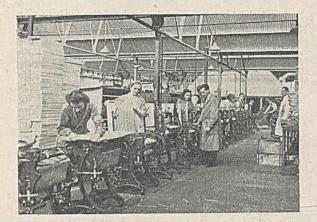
One of the Mangle Assembly Lines; the Side Members of the Machines are Left- and Right-hand Castings.
